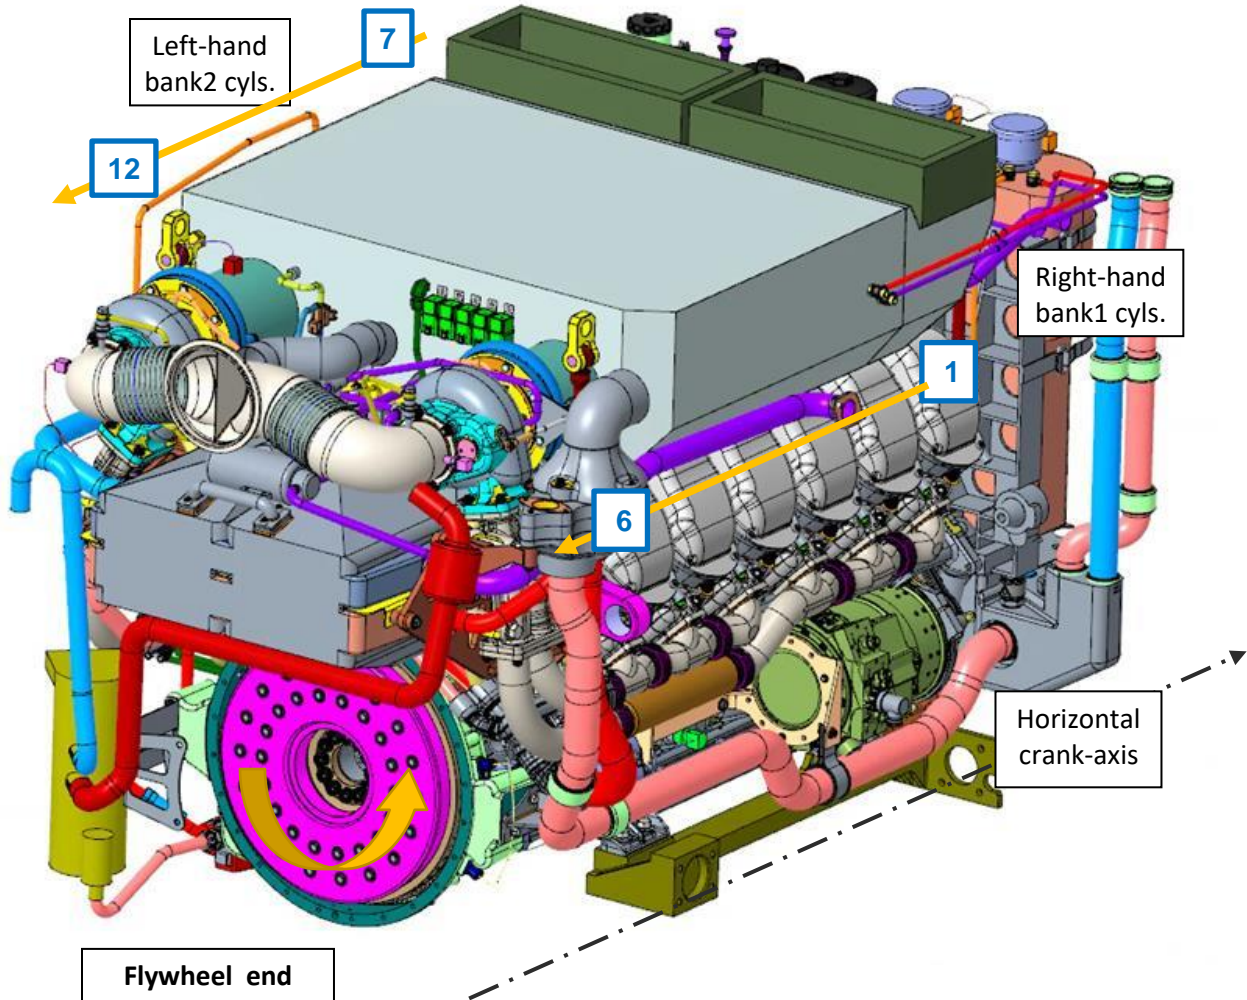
LATEST ENGINE MASTER ASSEMBLY CAD IMAGE VIEWED LOOKING ONTO FLYWHEEL (REAR) END FROM RIGHT HAND SIDE
